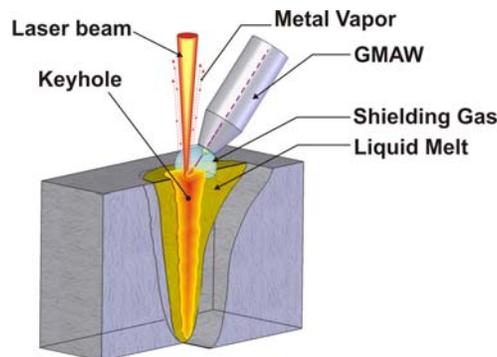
Hybrid laser-arc welding; GMAW: Mig, Mag, Paw; Laser beam: CO₂, Nd: YAG, High-power Diode; Shielding Gas: argon or helium.
